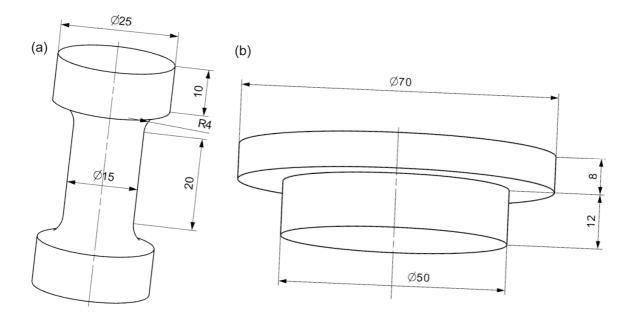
Specimen geometries: (a) barbell specimen and (b) gripper stamp specimen. Dimensions are in mm.
